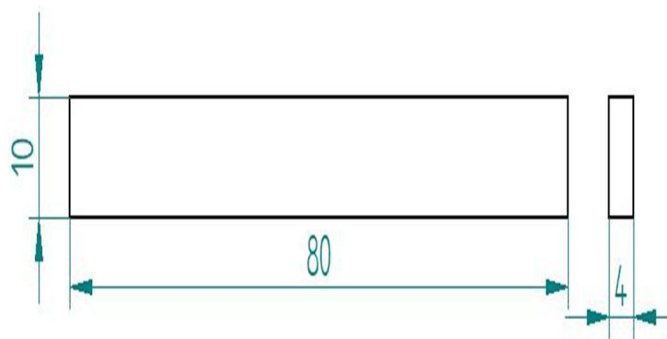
Dimension details of flexural test specimen (dimensions in mm)
